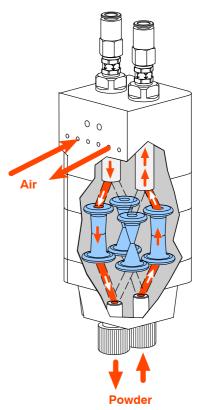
Left Side Drawing In, Right Side Dispensing Note: Rear, left view of pump.
